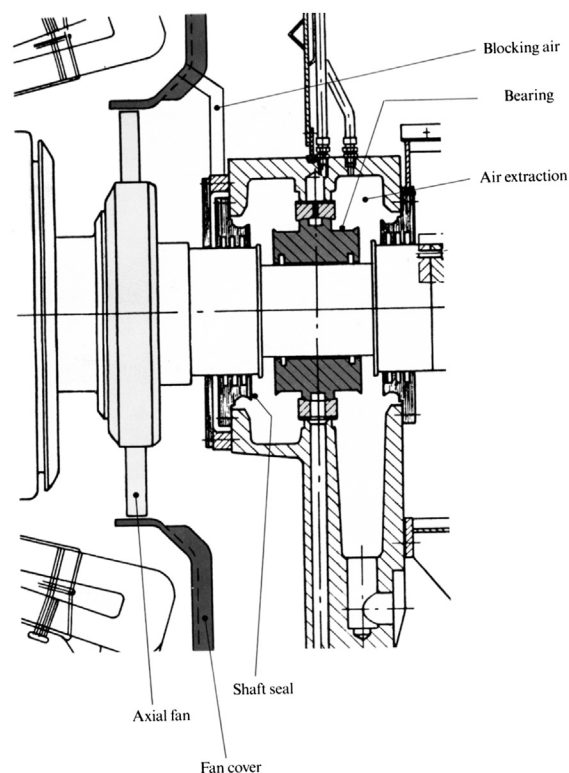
Fan bearing assembly. (Source: Alstom Power.)
